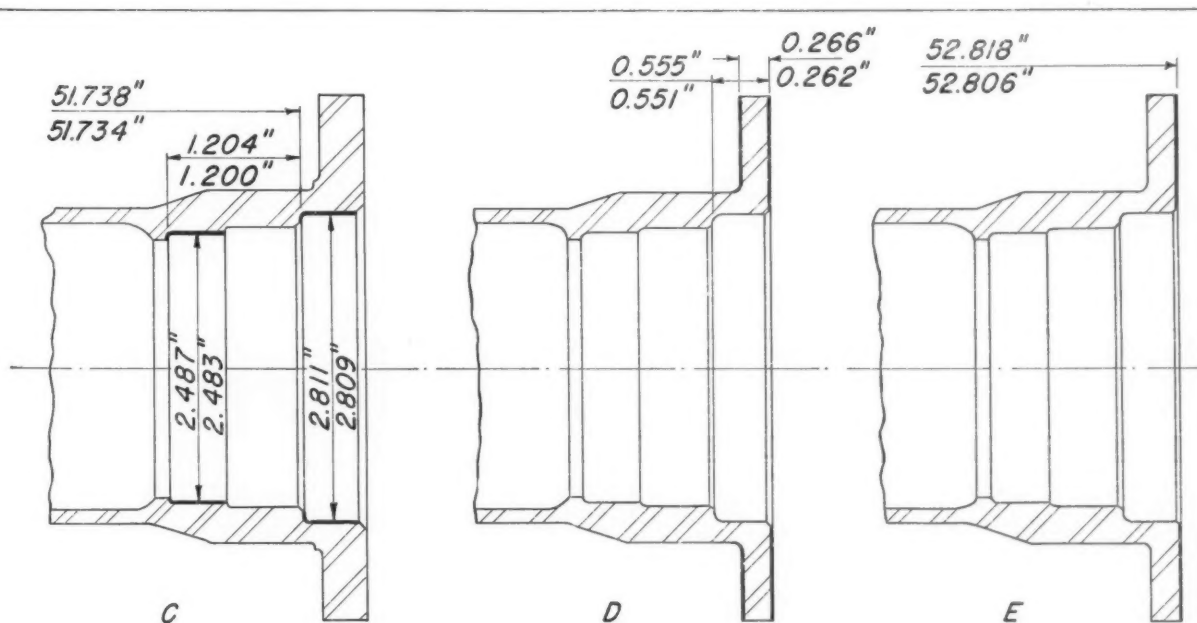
The Stationary Axle Housing is Turned by Hydraulically Fed, Rotating Tools
